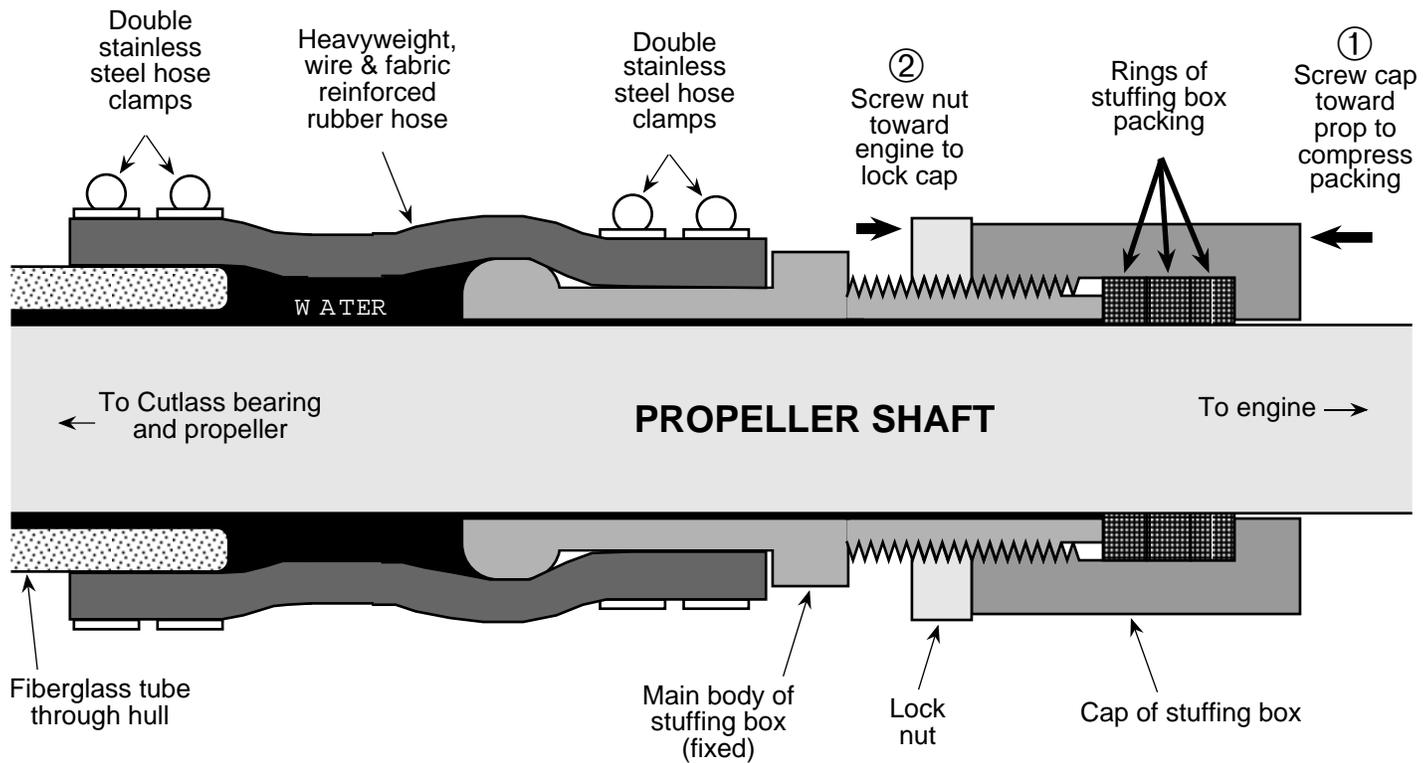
CROSS SECTION OF A GENERIC STUFFING BOX (NOT TO SCALE)
